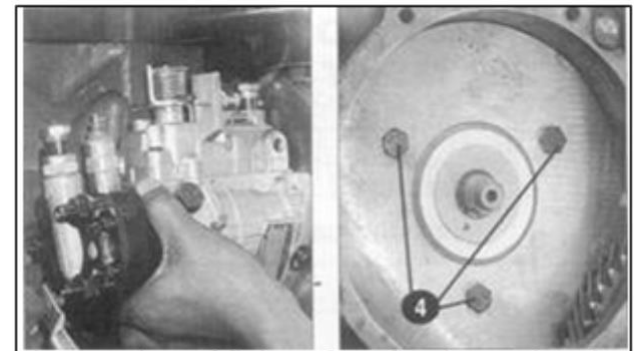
View of fitting of FIP fitted to engine plate (Courtesy: Escort Tractor)
